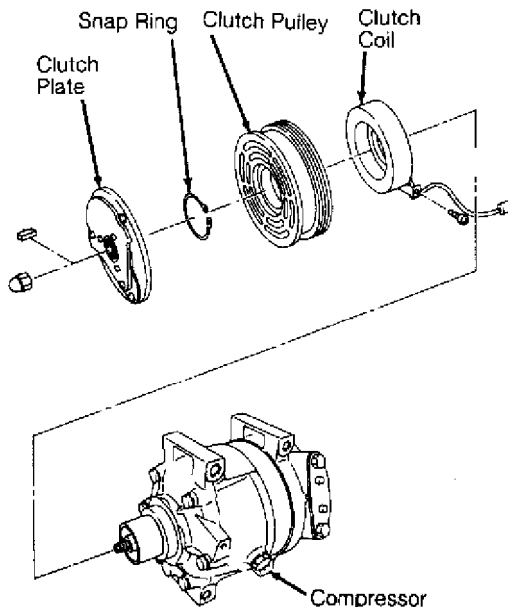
Exploded View Of Compressor Clutch (Calsonic V5)
